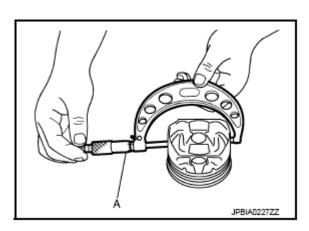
Measuring Outer Diameter Of Piston Skirt Using Micrometer Courtesy of NISSAN NORTH AMERICA, INC.
